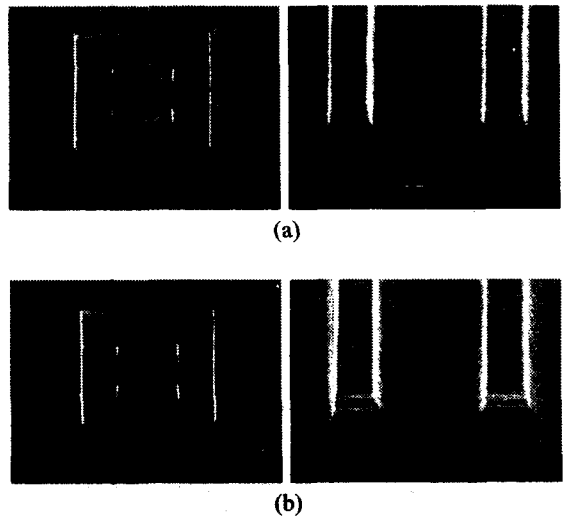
Machined micro structures according to depth of cut per pass. (a) Depth of cut: 1 μm ; Machining time: 1 hr 54 min, (b) Depth of cut: 5 μm ; Machining time: 1 hr 28 min
